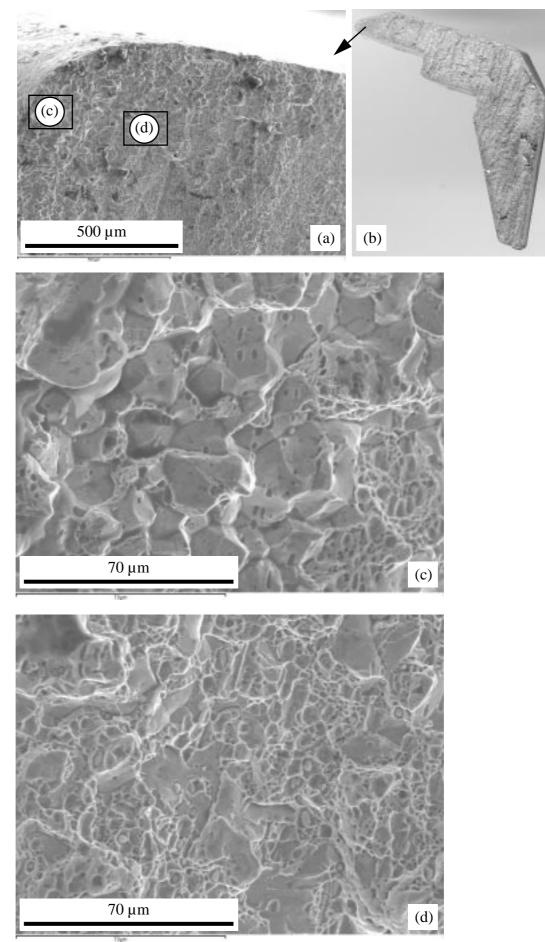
Fracture surfaces of the crack in the spring seat of the cylinder 4 (fig. 2g). SEM.
